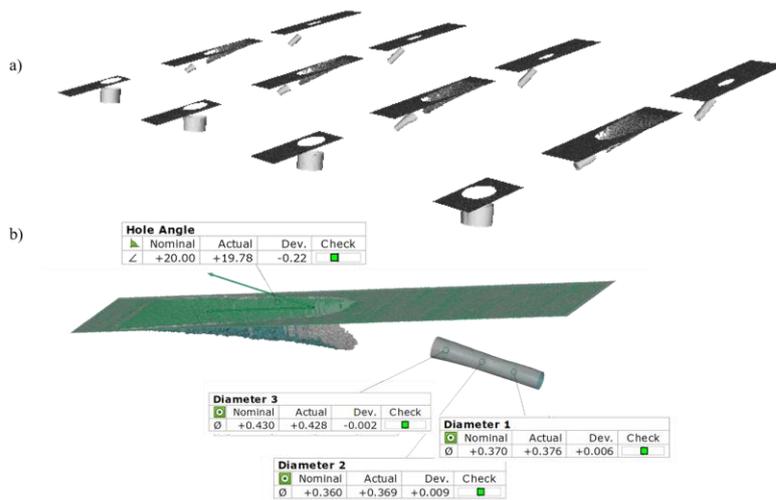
a) Multi-measurement on the plate. b) Geometric verification exemplarily for a fan-shaped cooling hole.
